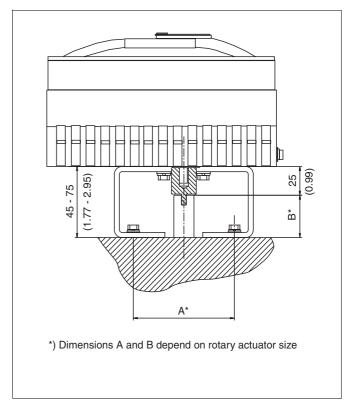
Mounting to rotary actuators to VDI/VDE 3845
